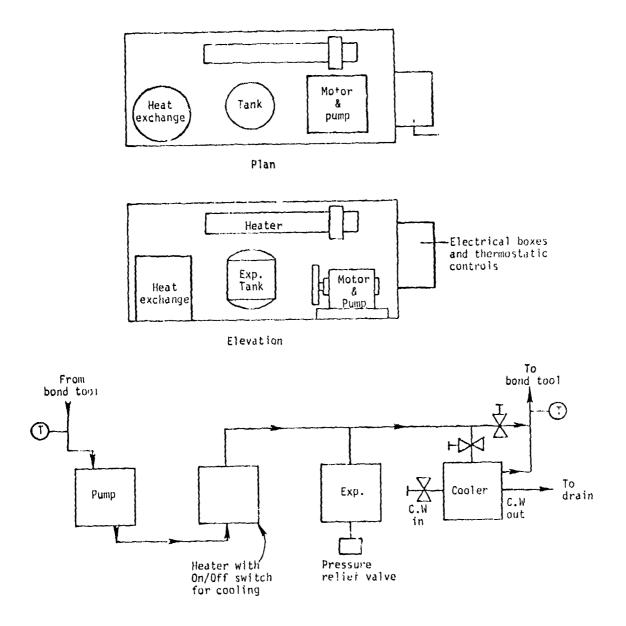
Layout and schematic of heating/cooling unit for boot molding fixture.
